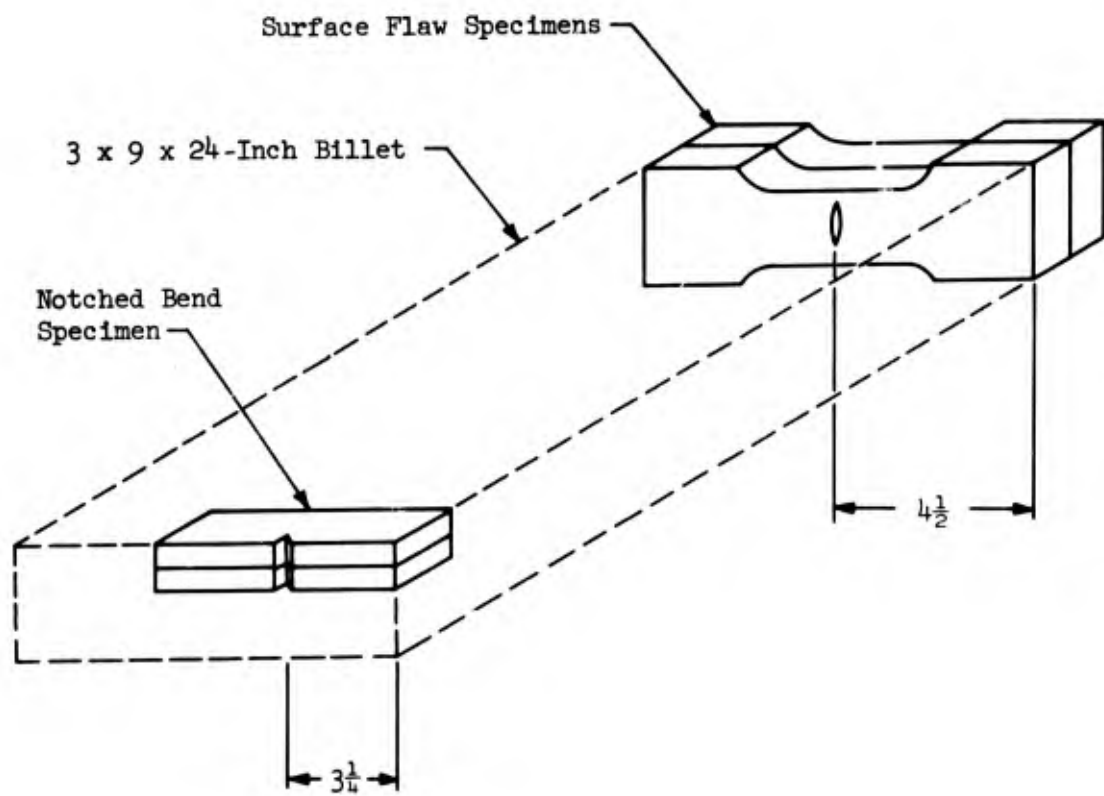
Notched Bend and Surface Flawed Specimen Billet Positions
